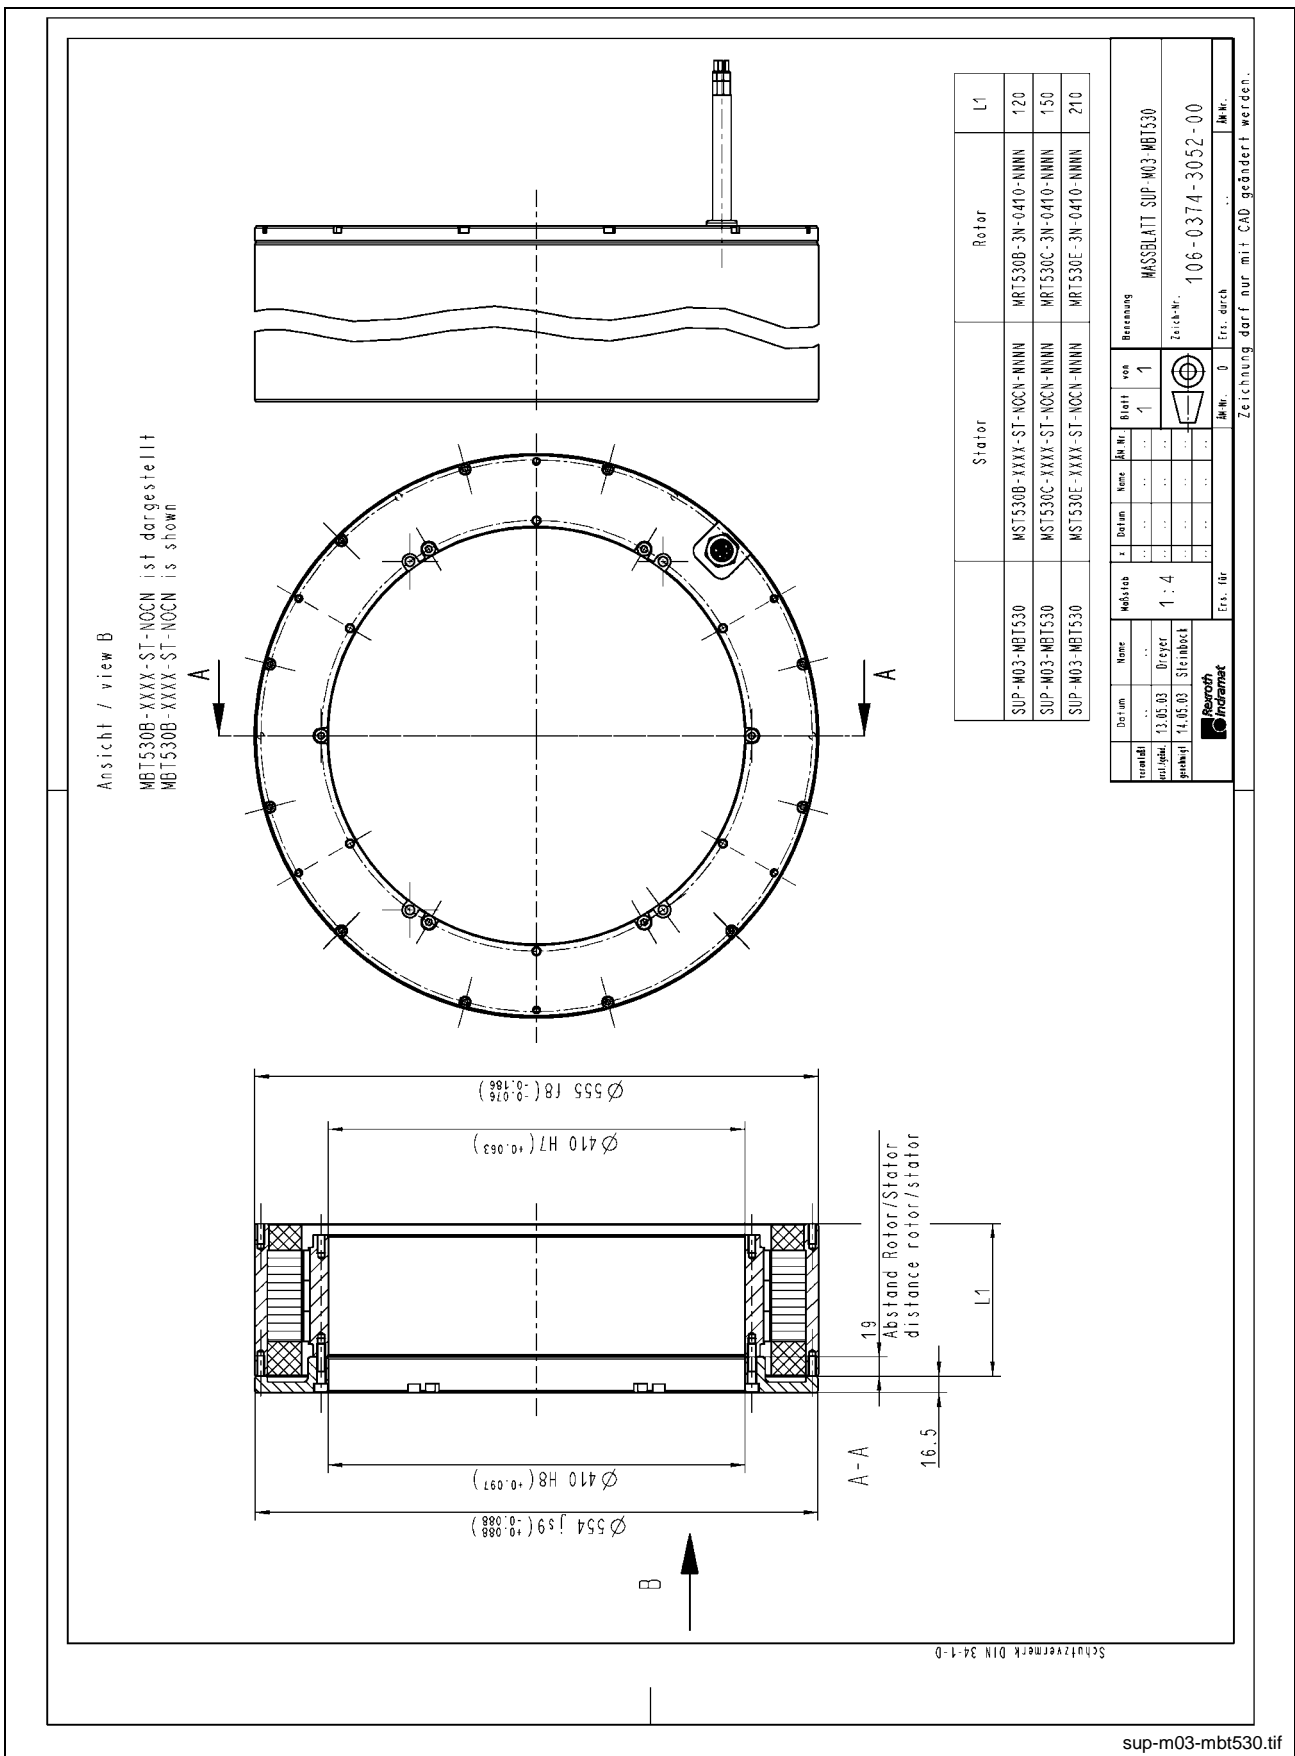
Dimension sheet for mounting ring in SUP-M03-MBT530
